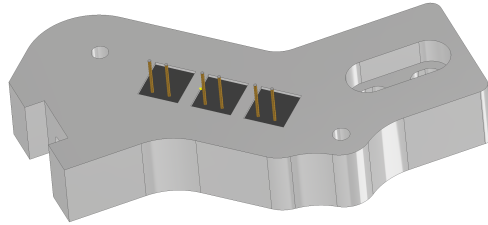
Halo MPPC fixture with MPPCs inside.
